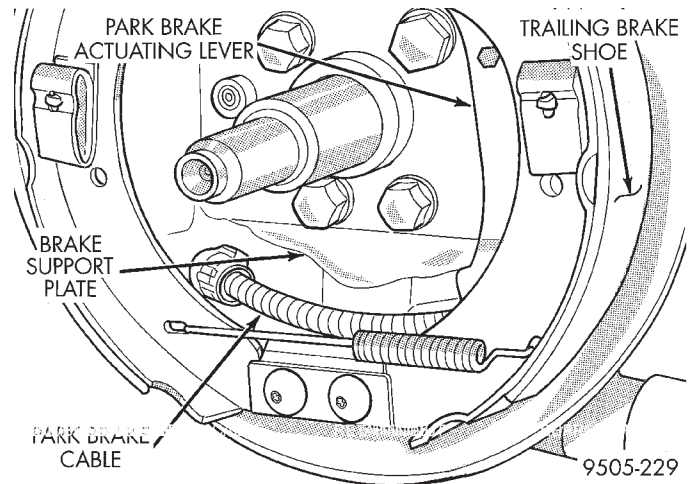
Park Brake Cable Attachment To Actuating Lever
